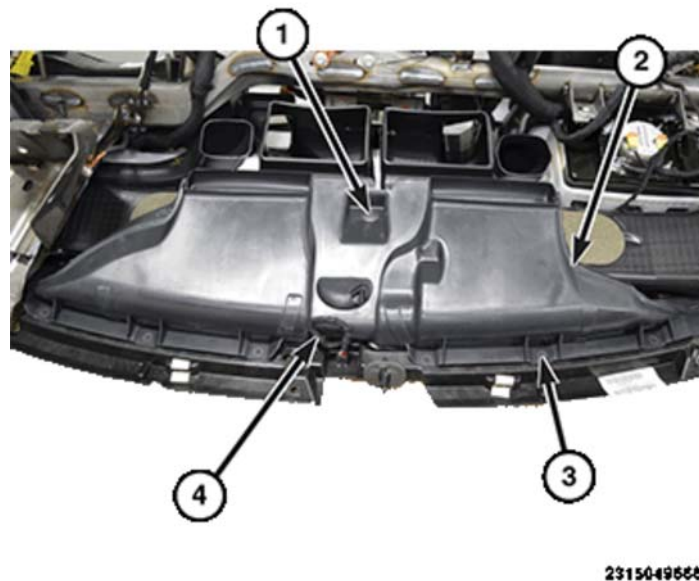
Push Fastener, Defroster Duct, Screws & Wire Harness
